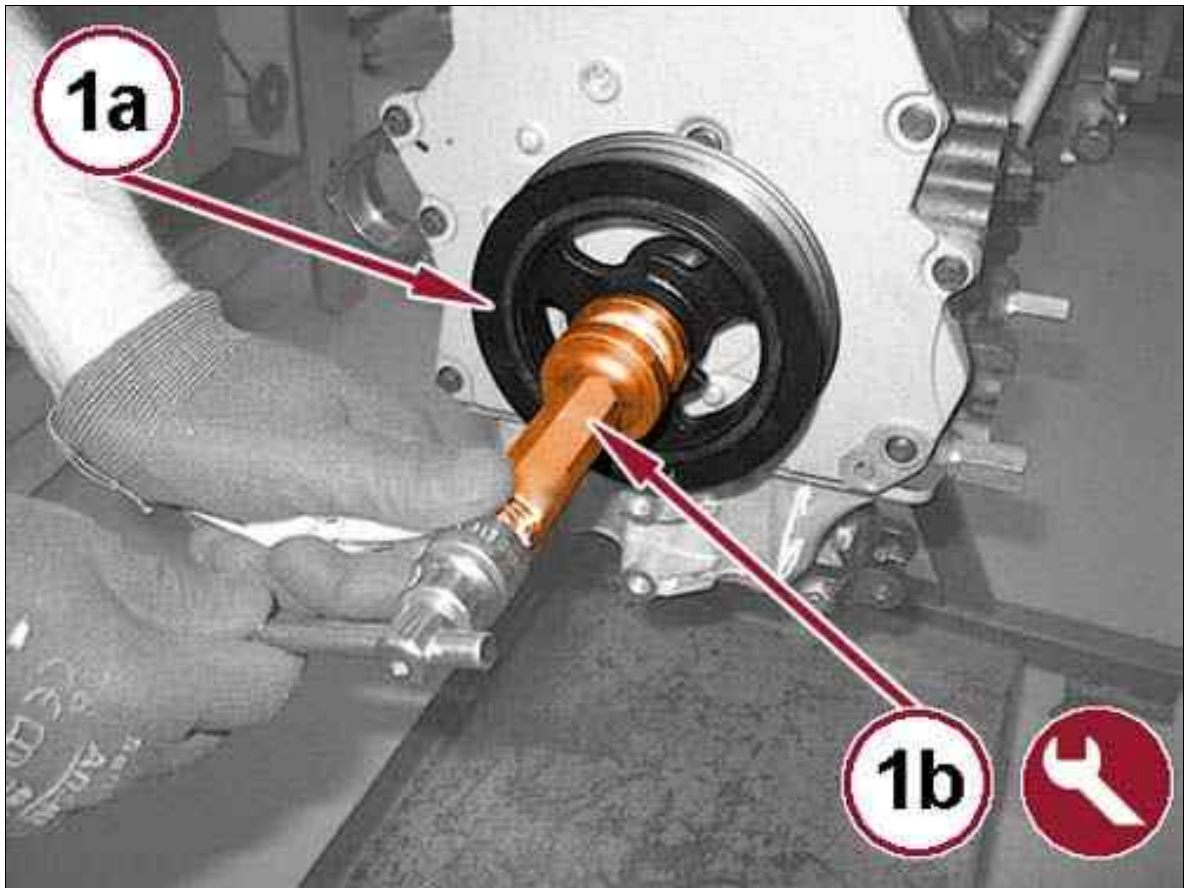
Using Special Tool To Install Crankshaft Oil Seal
